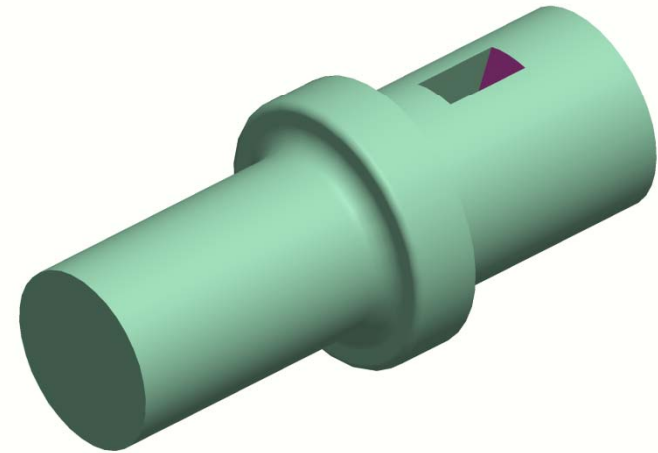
CRUSHING OF COTTER PIN AGAINST ROD
